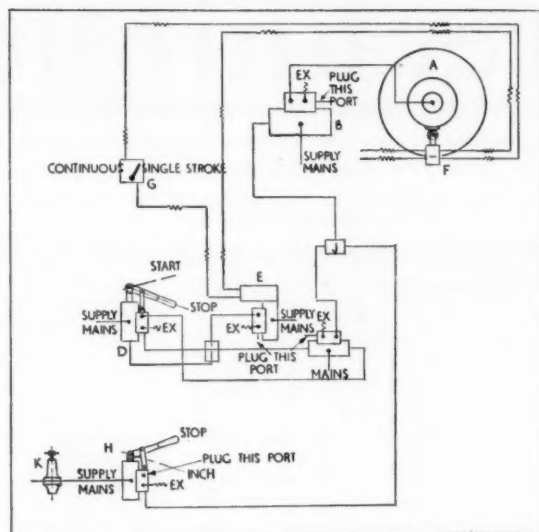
Circuit for pneumatic clutch on power press showing single stroke/continuous-stop/start and inching controls
